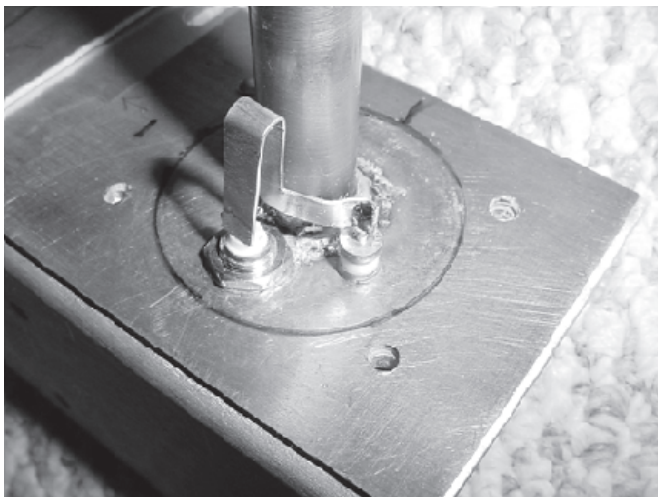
Photo A — This close-up view shows the assembly of one copper-clad circuit board material end plate with the copper pipe for L1 soldered to the circuit board, the BNC connector, copper flashing loop for L2 and the notch-adjust capacitor, C2, installed.
